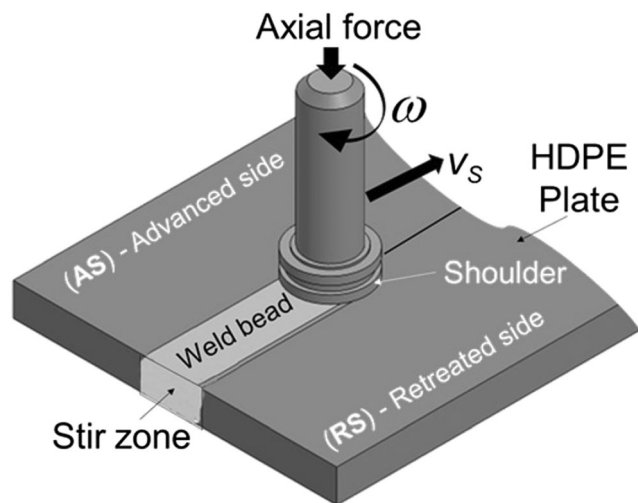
Sketch of friction stir-welding showing parameters and parts
